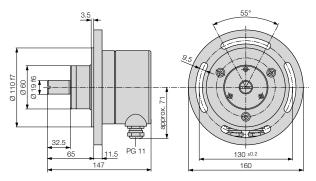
KINAX WT 707 with screw terminals, cable glands and flange.
